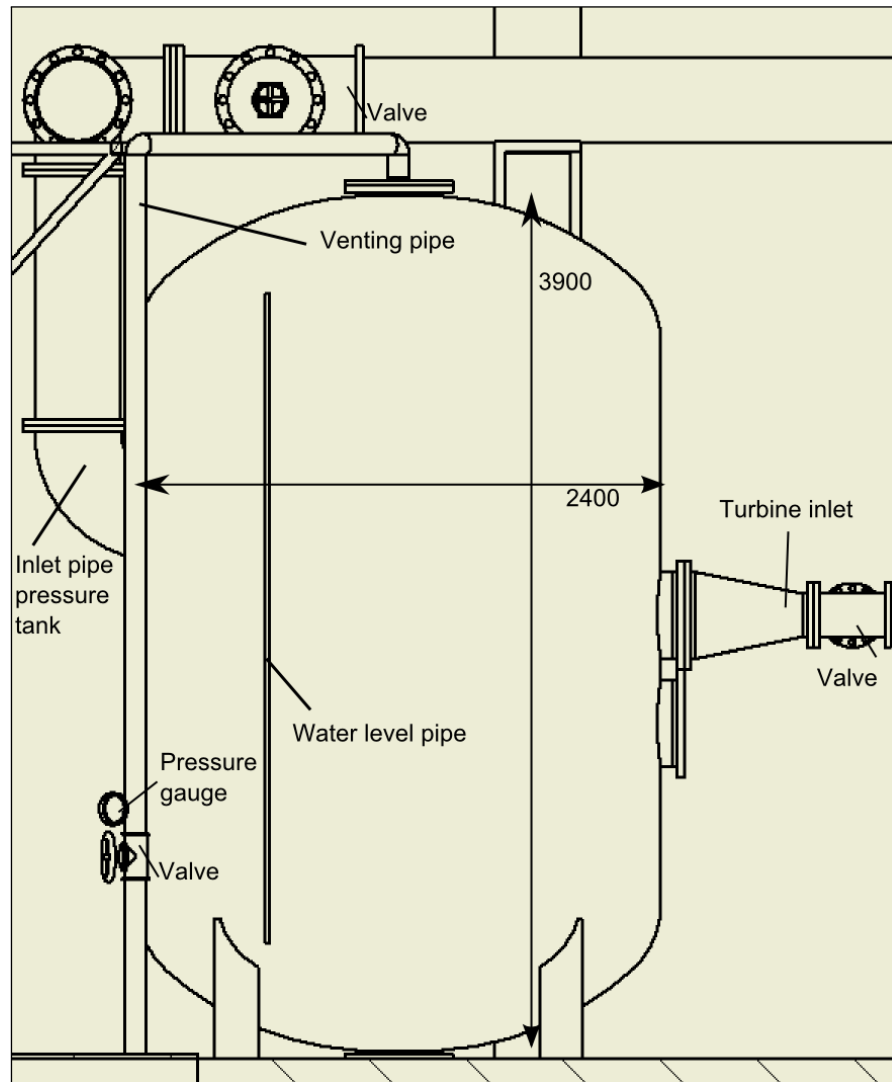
Drawing of the suggested pressure tank for TTL. All dimensions are in mm.
